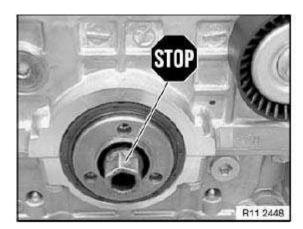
Central Bolt Damage Warning Courtesy of BMW OF NORTH AMERICA, INC.
